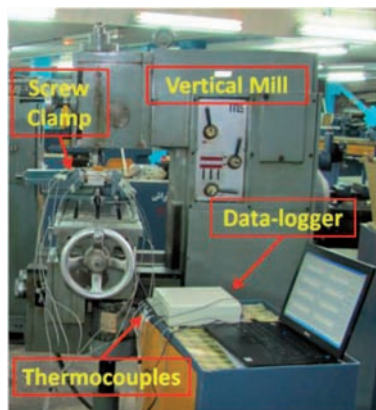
Welding equipment and temperature measurement instruments
